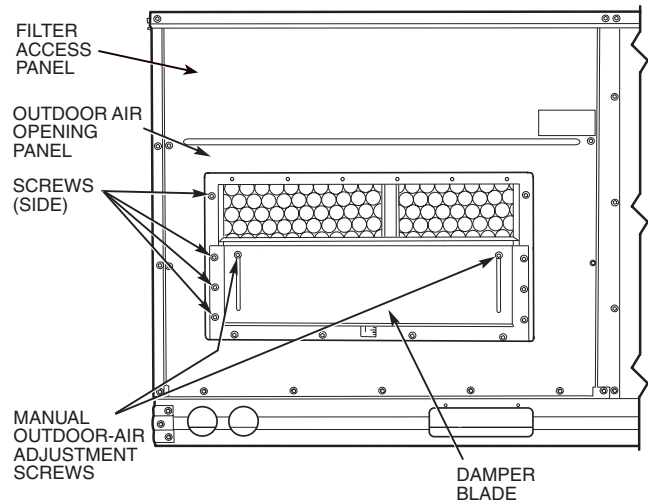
Damper Panel with Manual Outdoor-Air Damper Installed
